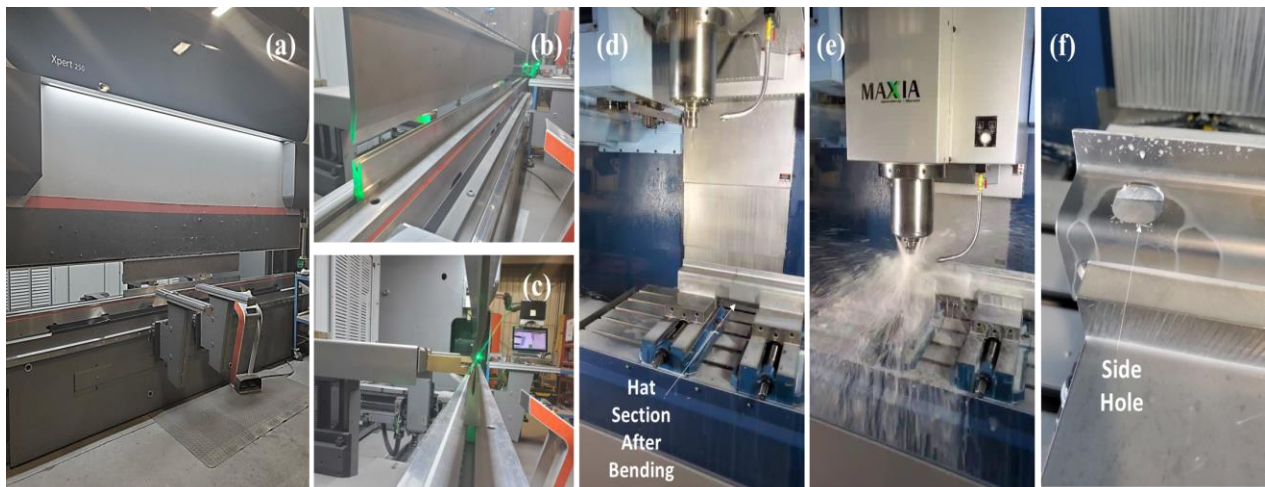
Fabrication of the Hat section using a high precision press brake (a) with laser alignment (b) and bend angle automated correction (c), and then machining on a CNC-operated 5-axis vertical machining center (d-f).
